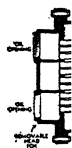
Small portable cooler with self-contained pump and cooling coils for circulating and cooling oils.
